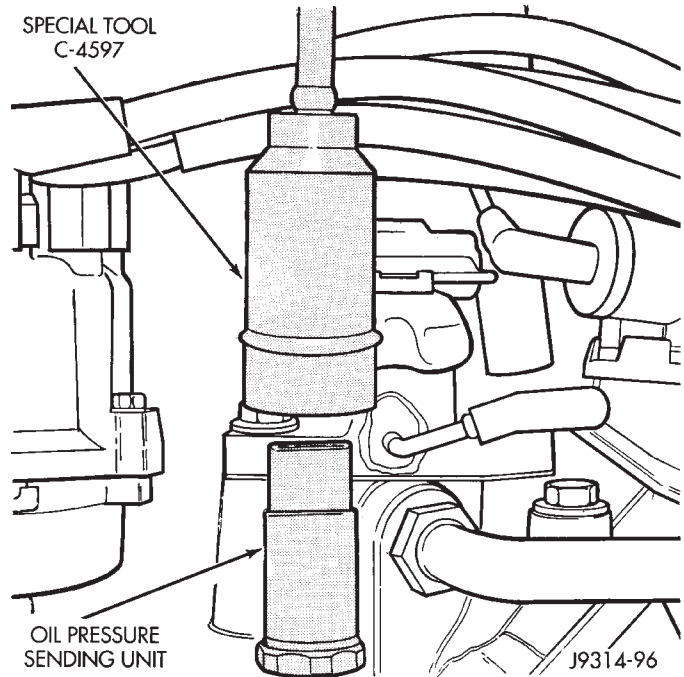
Oil Pressure Sending Unit—Removal/Installation—5.2 L Engine
